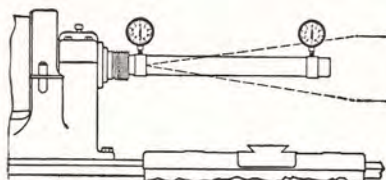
Testing Alignment of Headstock Spindle with Lathe Bed.
